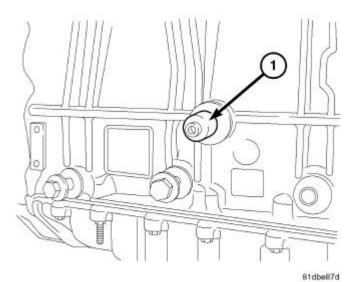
CRANKSHAFT LOCKING TOOL Courtesy of CHRYSLER LLC
